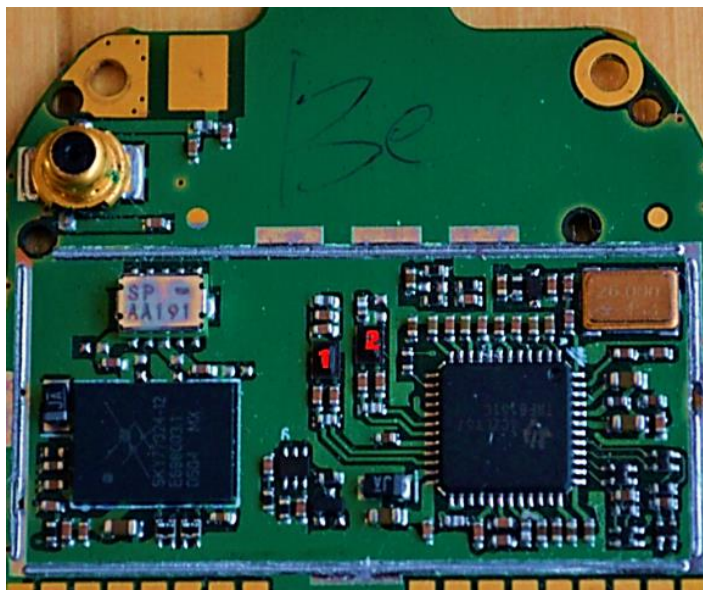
Motorola phone, after parsing and desoldering the protective panel.
